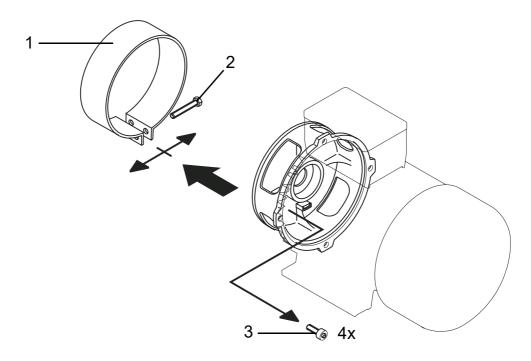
Preparatory disassembly of for flange mount (dual-bearing, BG 132 model with standard bearing plate)
